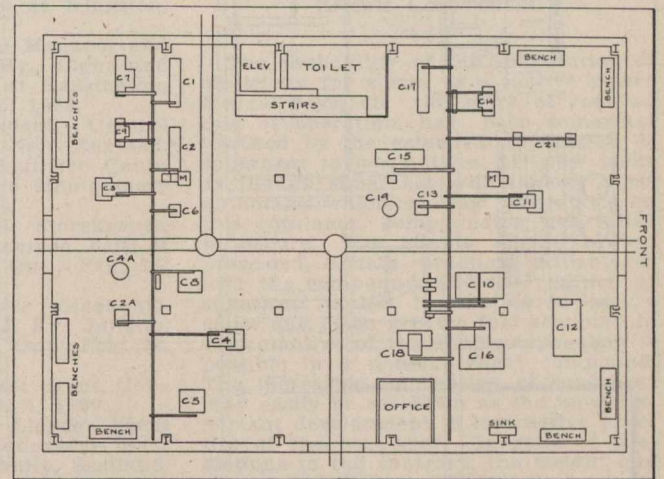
Plan and Tool Layout of Locomotive Carpenter and Pattern Shop.
